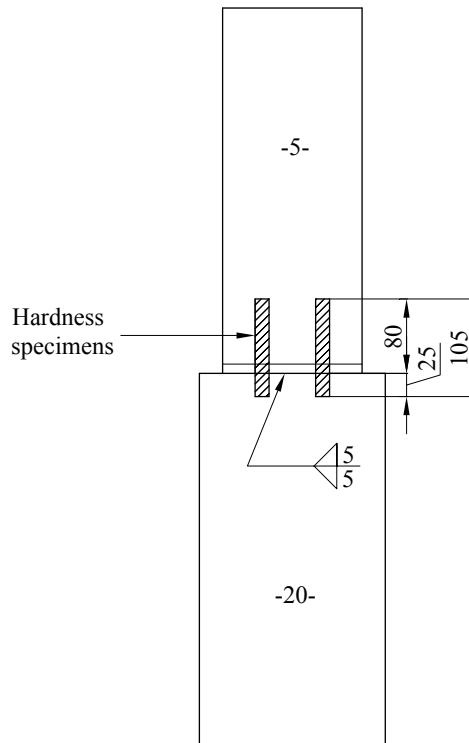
Hardness specimens cut from a  $0^\circ$  fillet-welded specimen.
